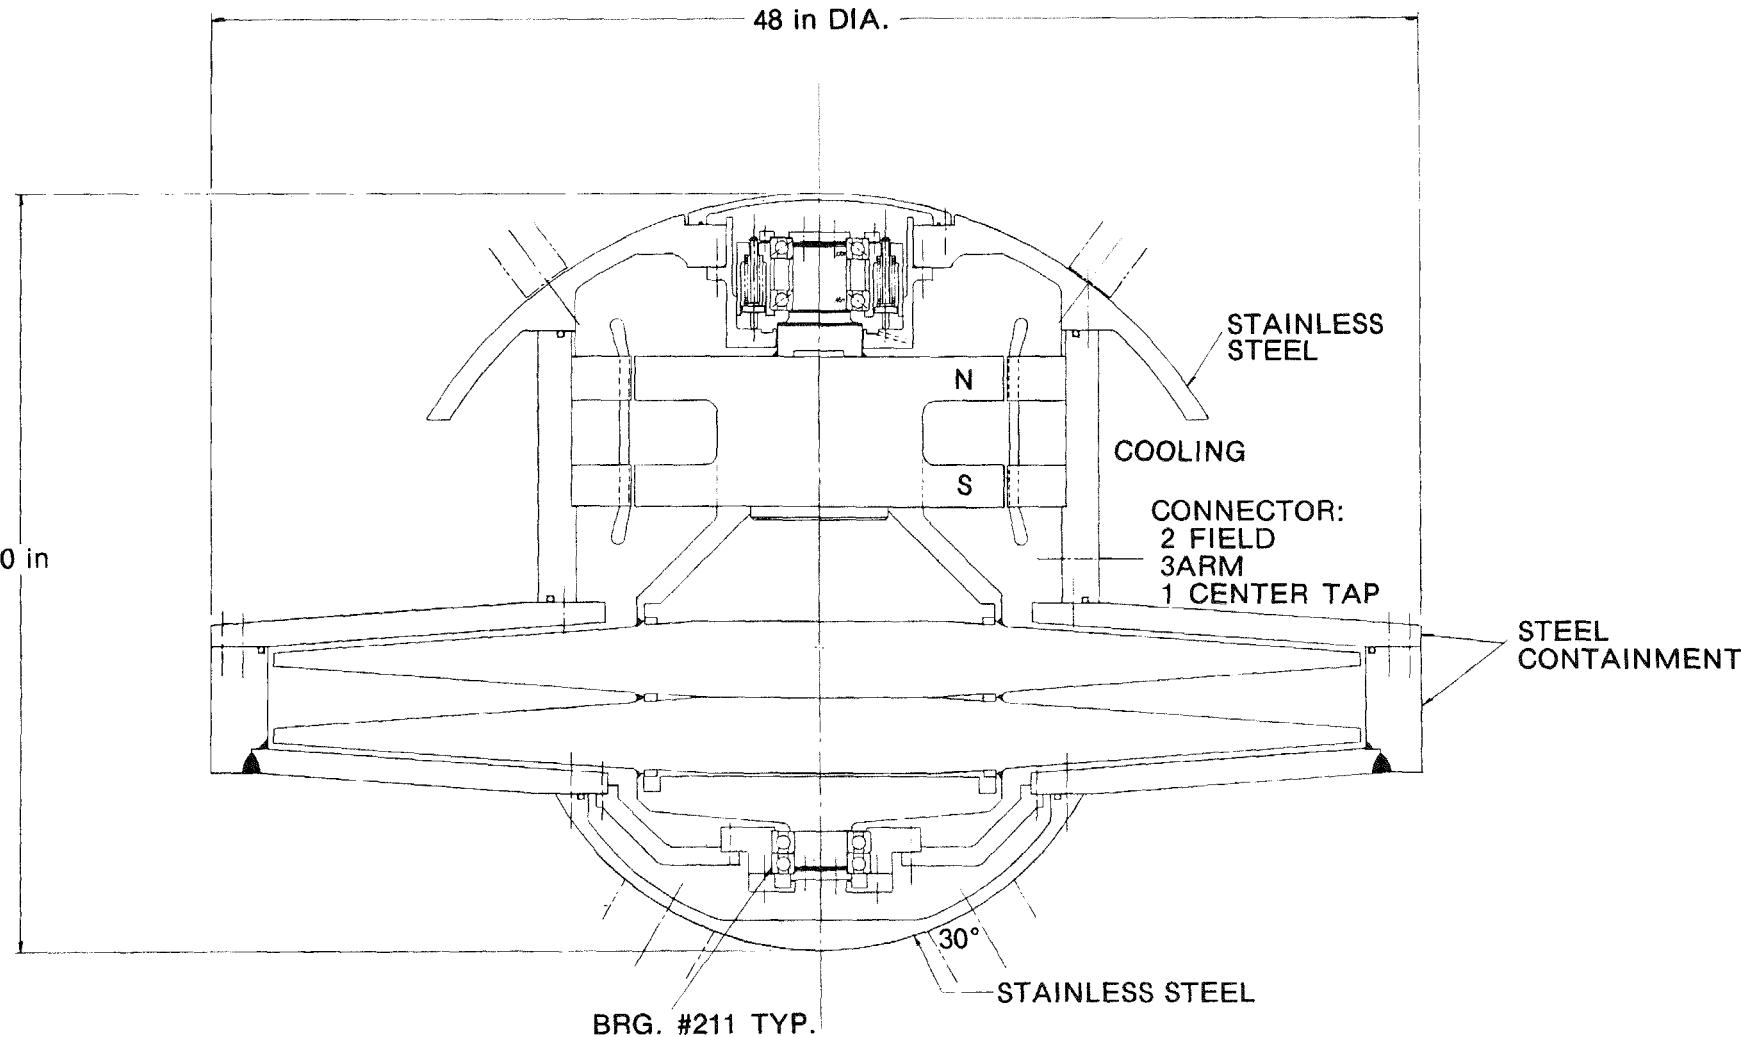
Flywheel Capsule (6 kW hr Flywheel)
